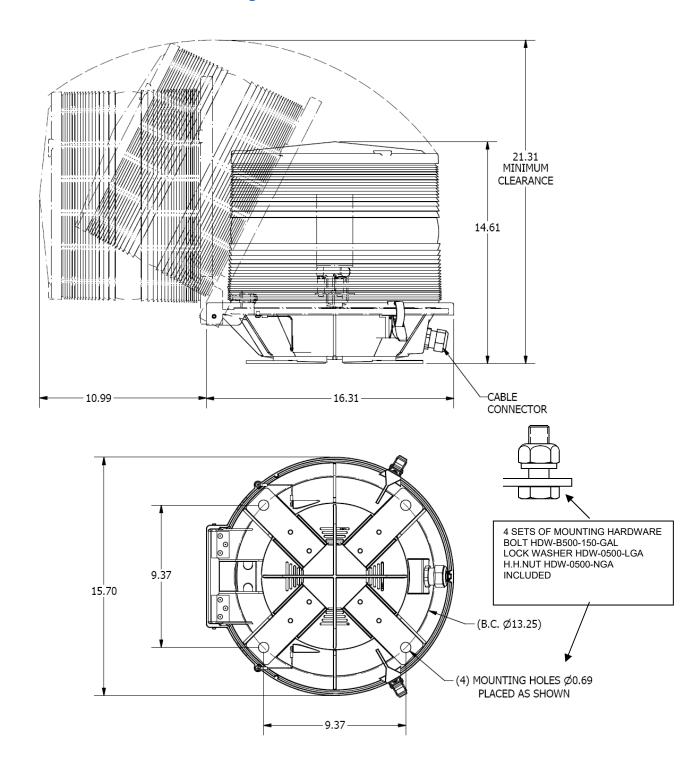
IFH-1400 / IFH-2400 Flash Head Dimensions and Mounting Detail
